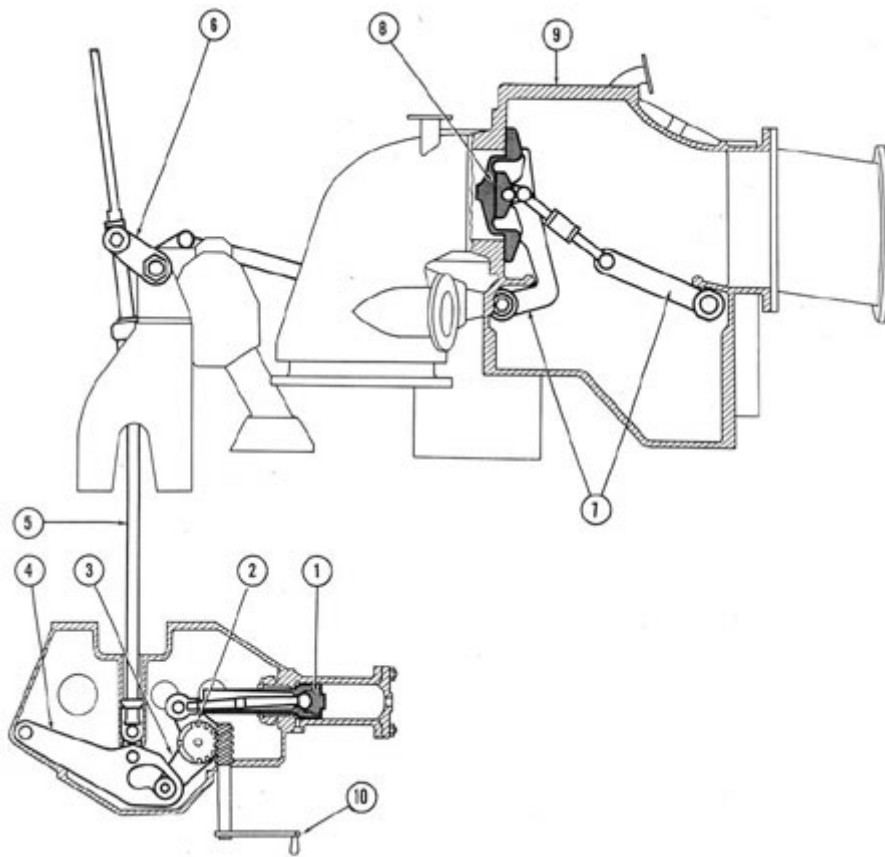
Diagram of main engine drowned-type exhaust valve operating gear and hydraulic cylinder, CLOSE.
